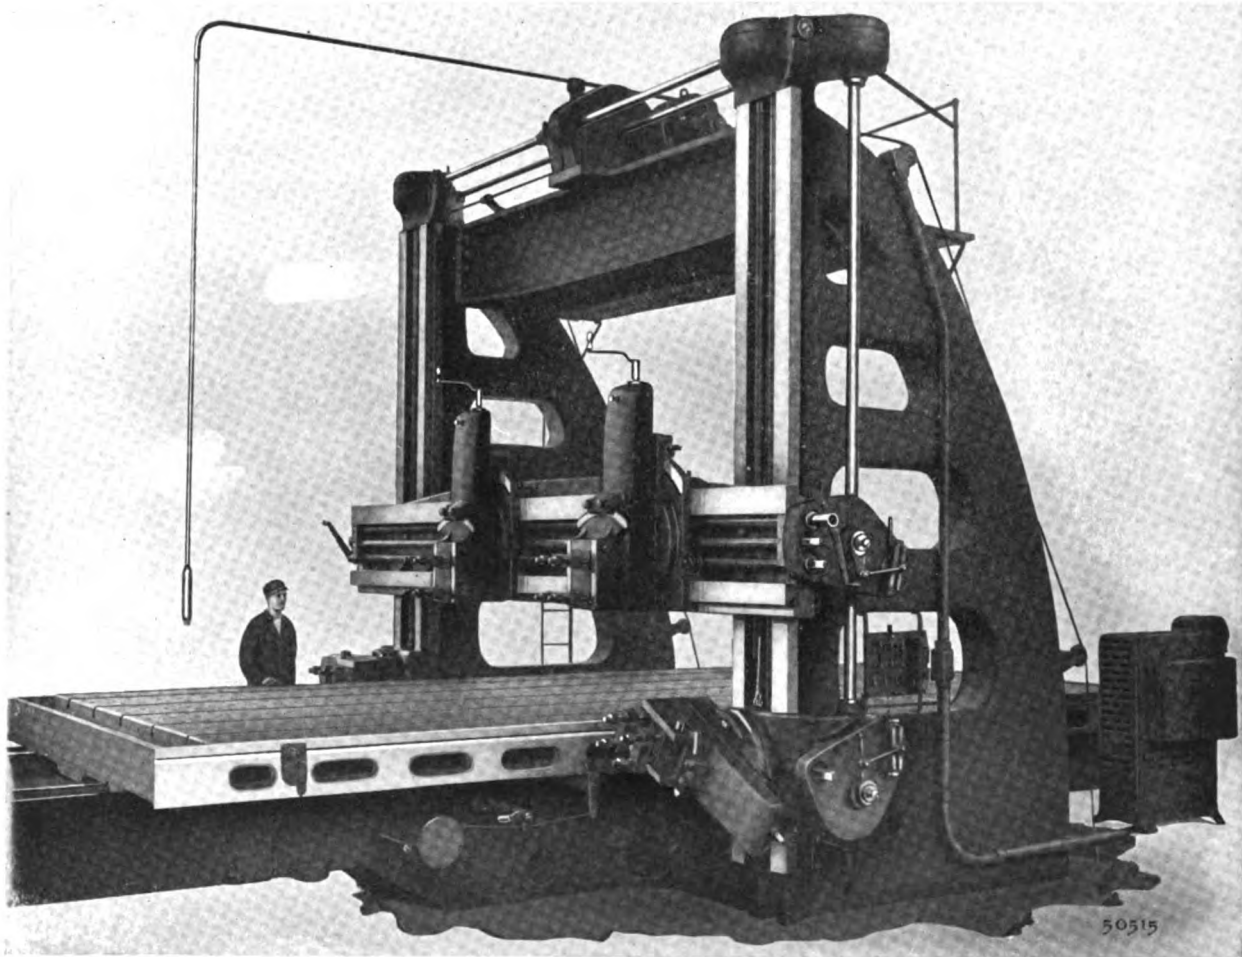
14-Ft. (4.3 m.) Planer with Electric Feed and Rapid Power Traverse to Tool Heads
